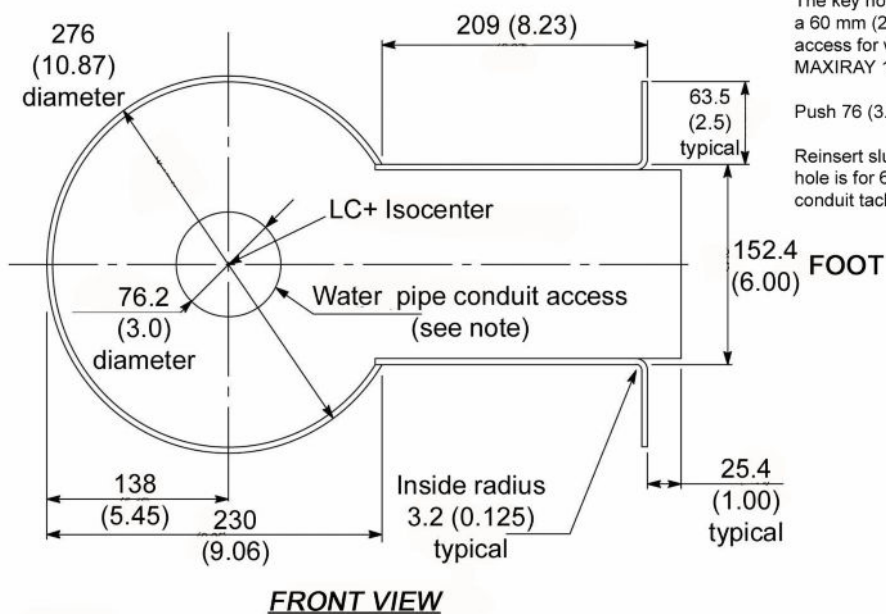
Cable Conduit For On-Grade Floor Anchor Kit
